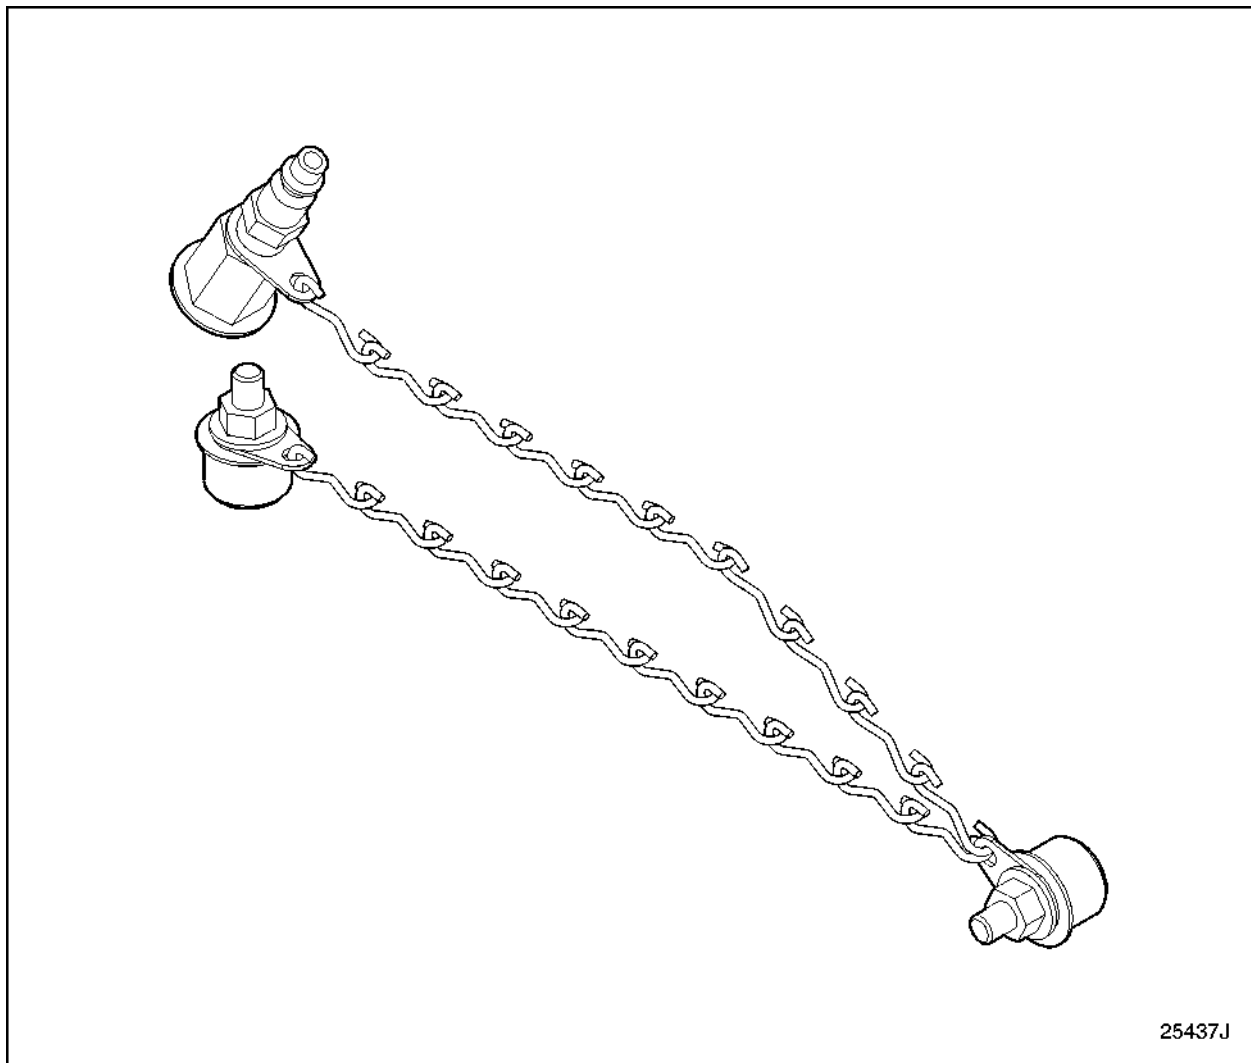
Cylinder Head Pressure Test Fixture, J 41567
